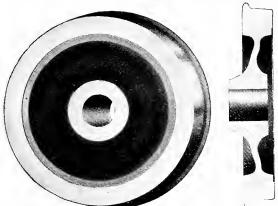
Cast Steel Plate Center with Tire Held by Shrinkage and Shoulder.
